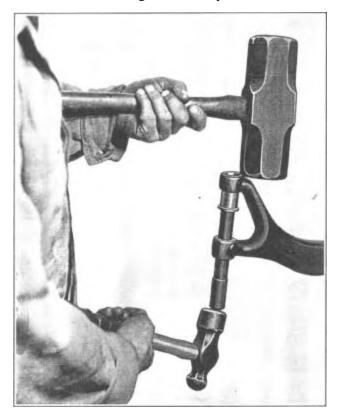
Installing Pivot Pin Upper Bushing—Tools J-469-2, J-990-2
